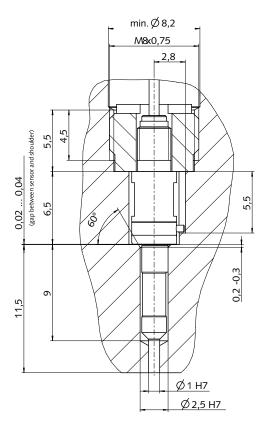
Optional installation with mounting nut Type 6460A1 and key way pin Type 65001430
